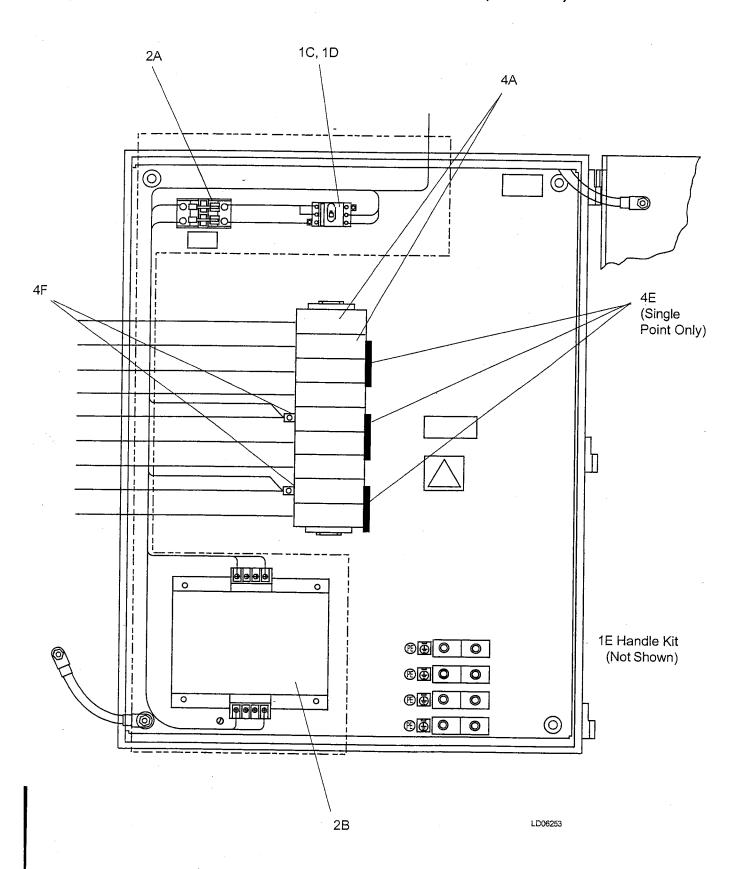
OPTION PANEL SHOWN WITH POWER TERMINAL BLOCK (REF. TABLE 19, PAGE 60)
